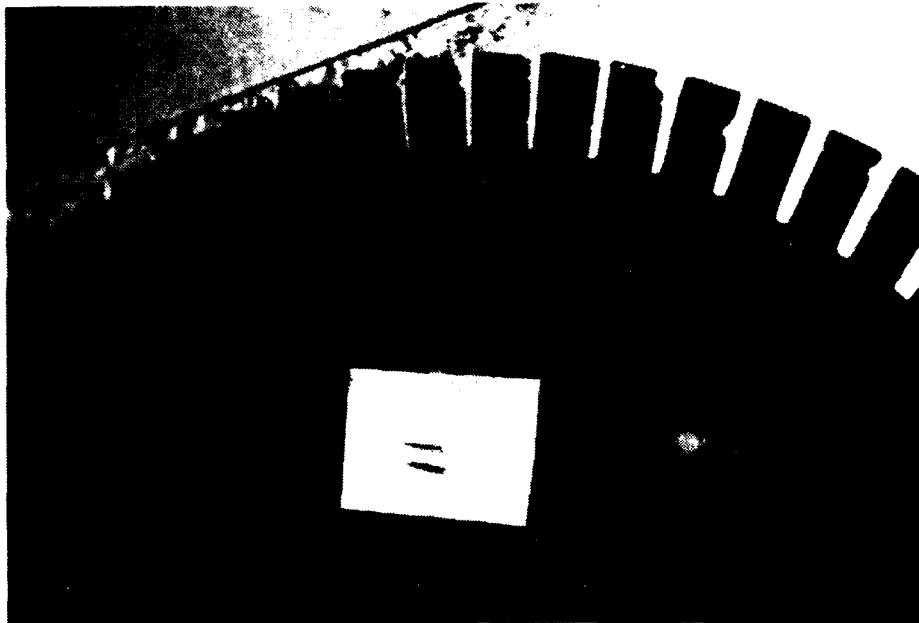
Eleventh stage compressor disk of Ni-Cd plated steel showing Corrosion pitting.
